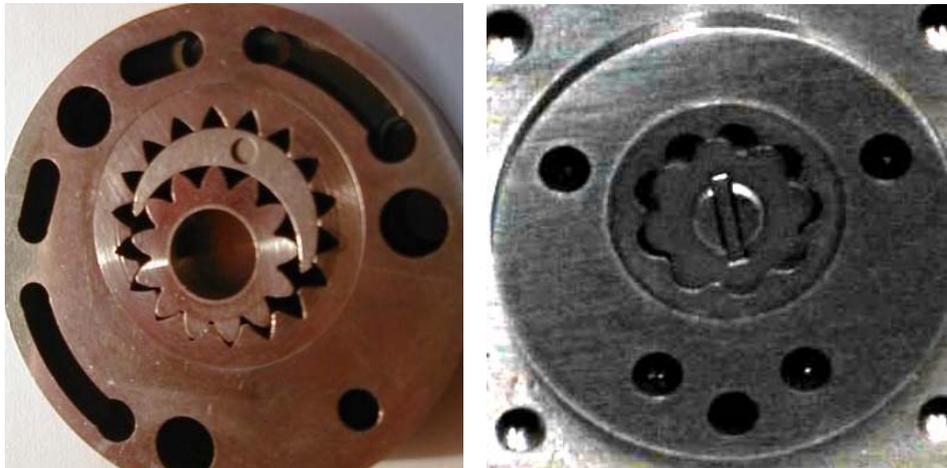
Gears of the Suntec pump (left) and Delta pump (right).
